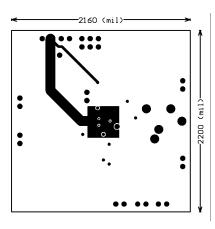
Recommended YZR PCB Layout: Mid Layer 2
